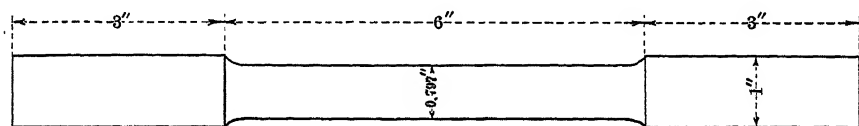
SHAPE AND DIMENSIONS OF TEST PIECES.
